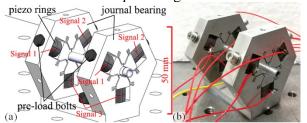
Design of the active non-contact journal bearing with six driving units: (a) 3D model and (b) functional prototype.
